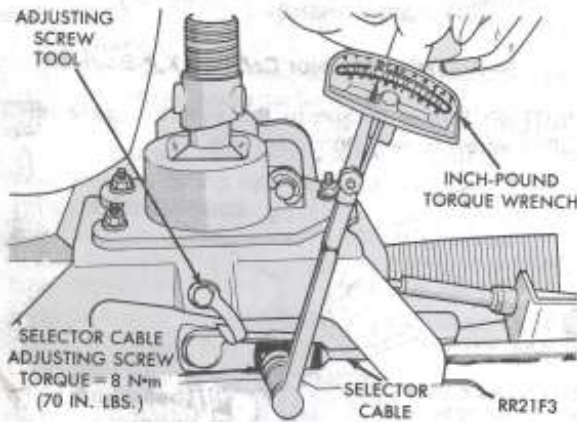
Adjusting Selector Cable (G,J-Bodies)
